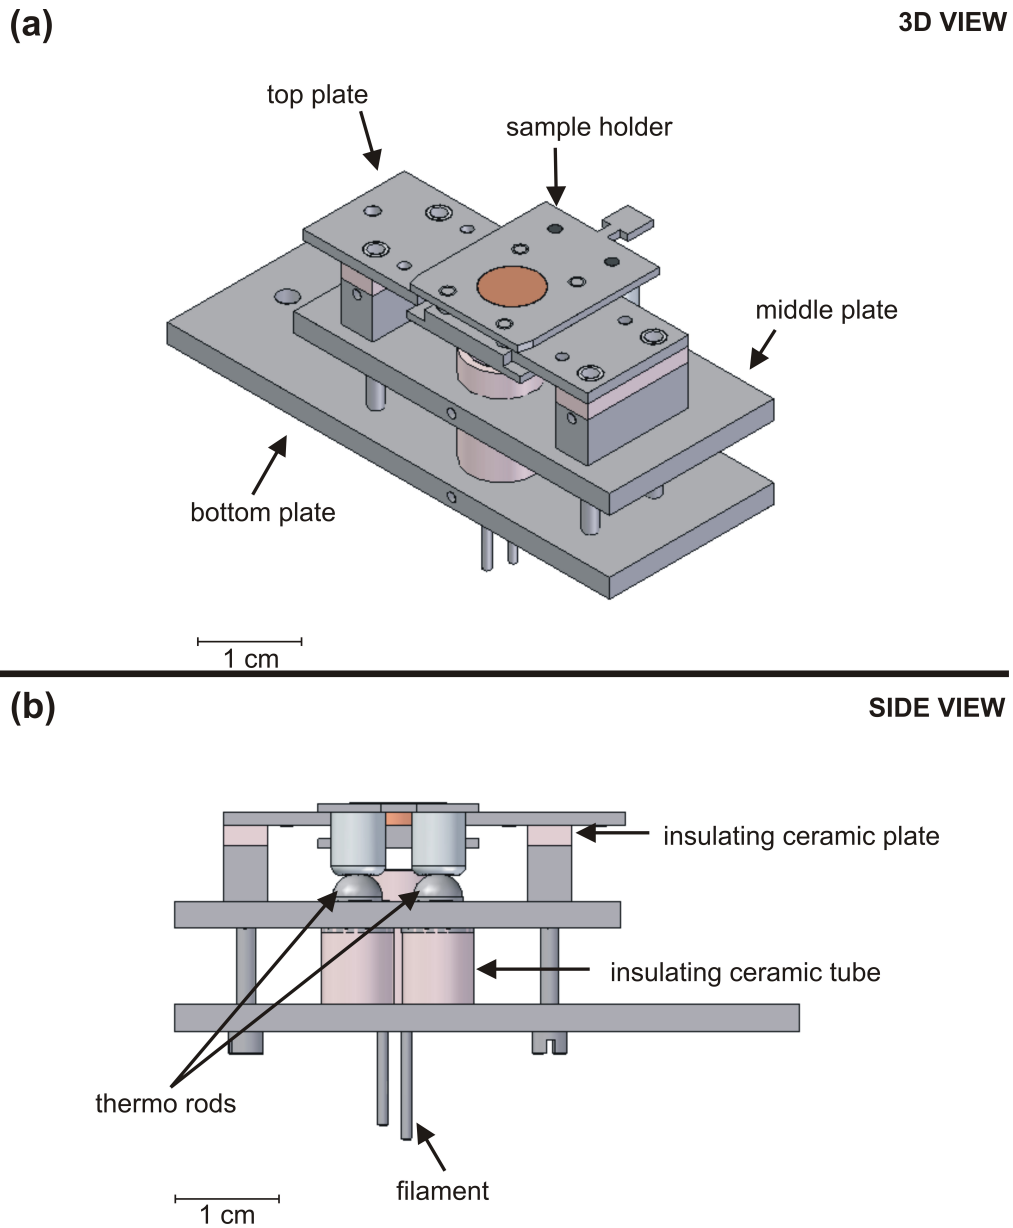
Sketch of the heating stage with sample (a) 3D view (b) side view.
